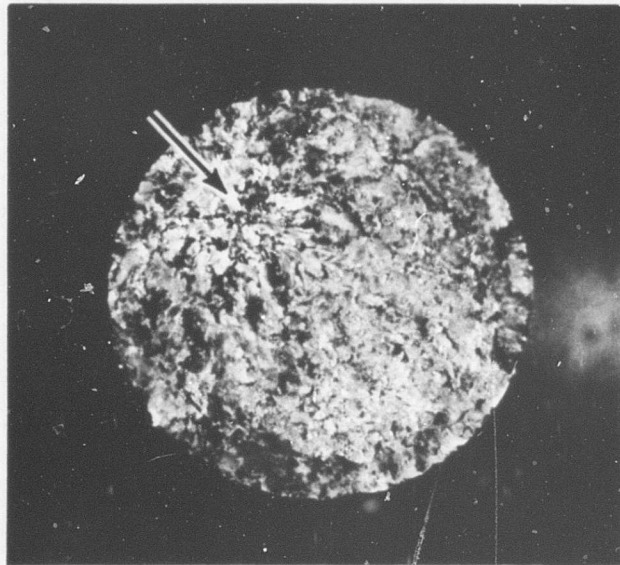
Fatigue Fracture Surface of Ti-13V-11Cr-3Al Axial Tension-Tension Fatigue Specimen.
